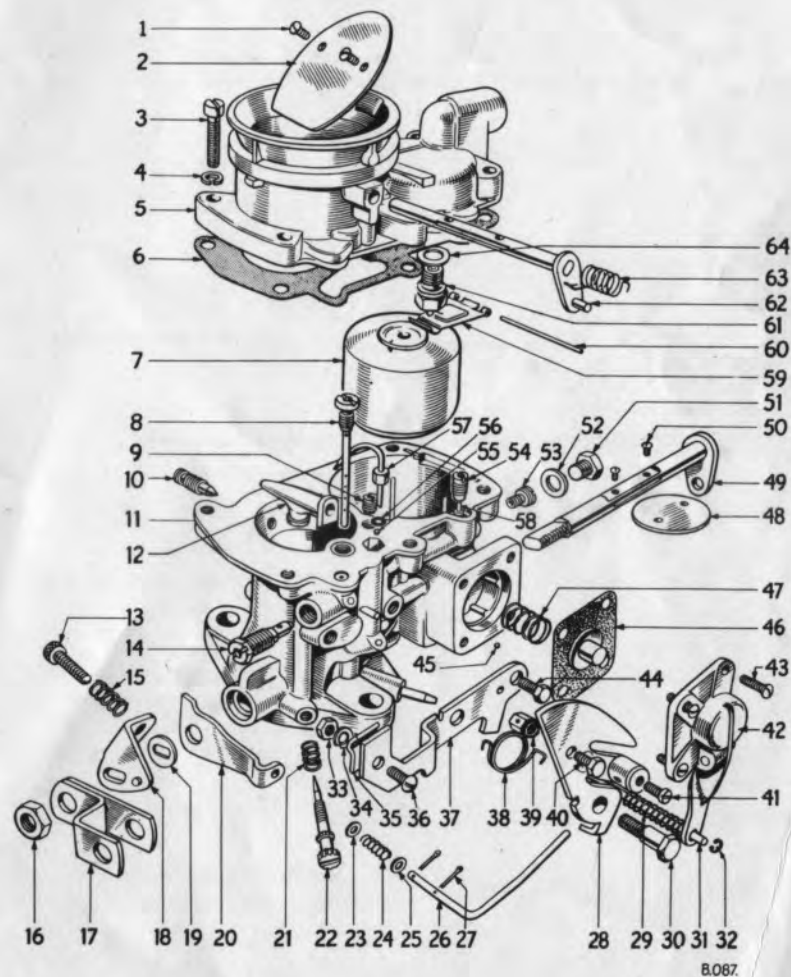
Dismantled B.30 P.S.E.I. Carburettor.
